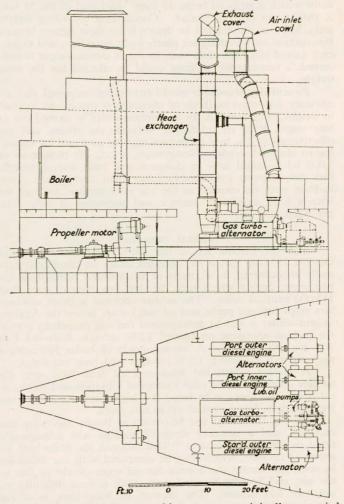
Arrangement of machinery; space originally occupied by starboard inner Diesel alternator shown dotted
